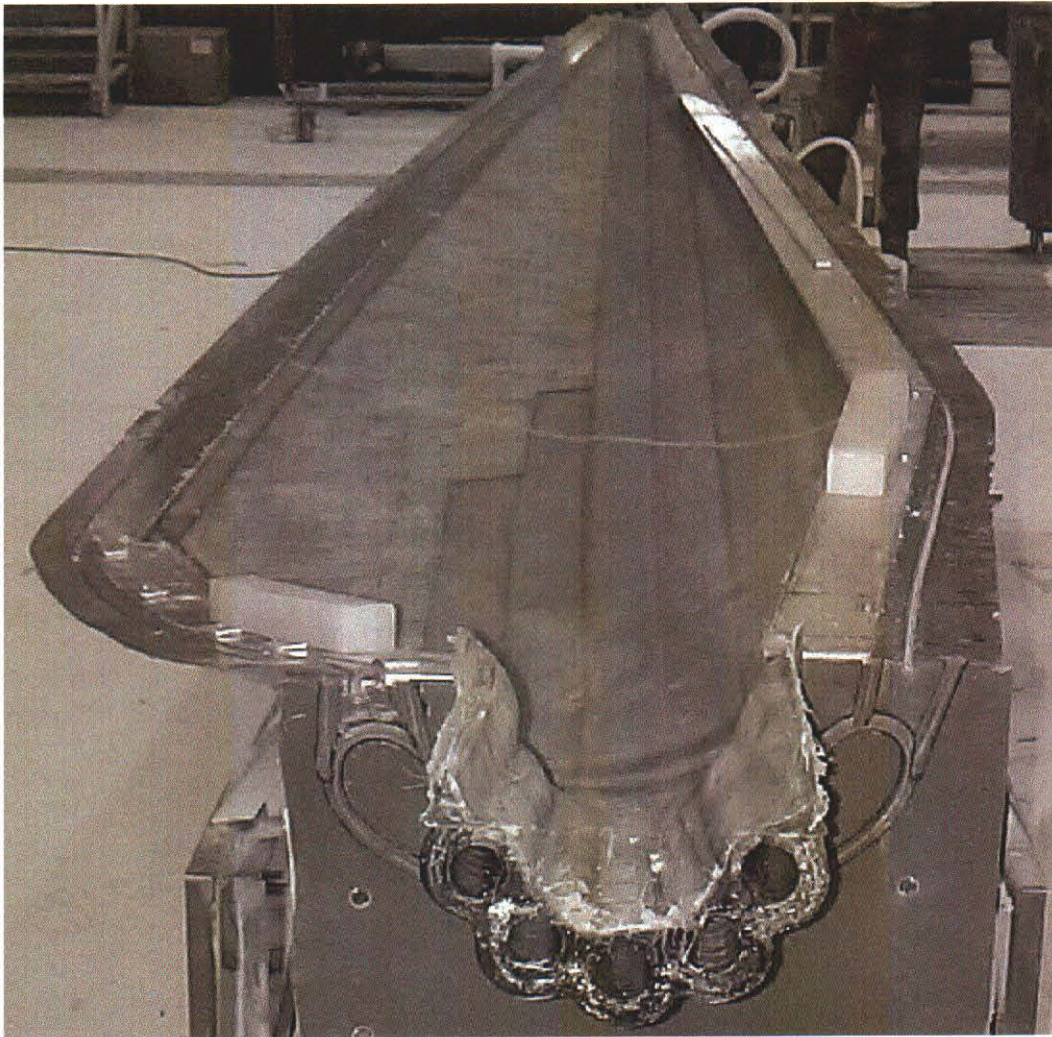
Photo of the ERS Blade Low-Pressure Shell and Mold
